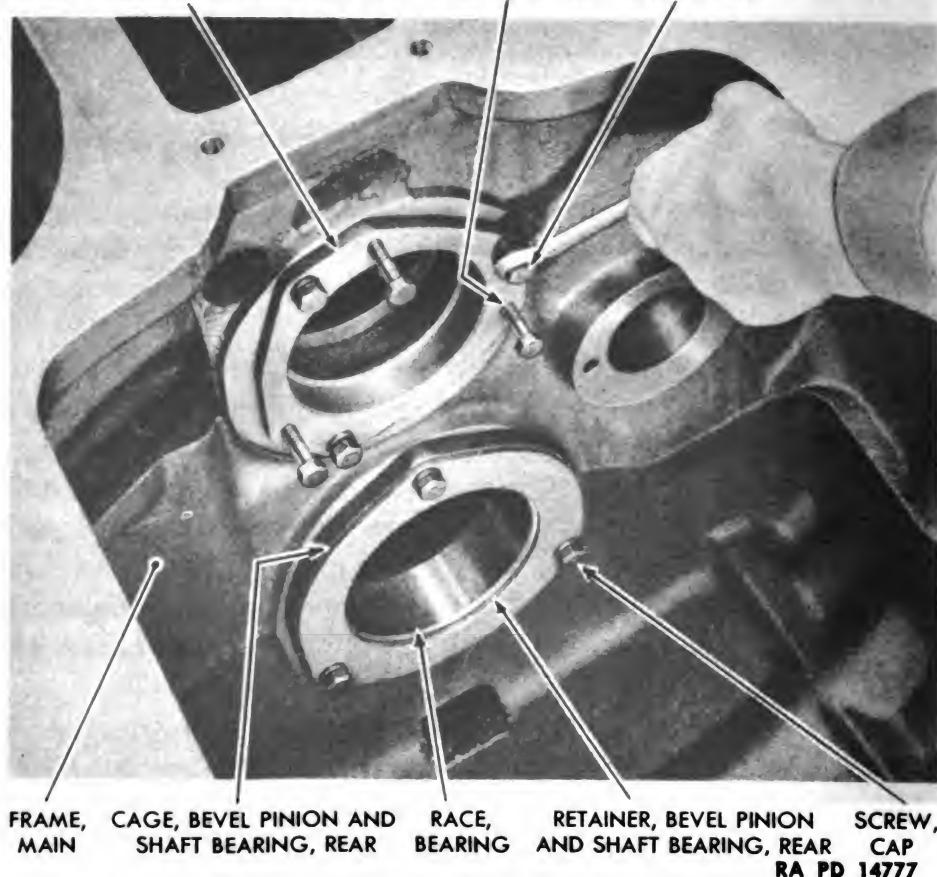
Rear Spline Shaft Bearing Cage Removal
